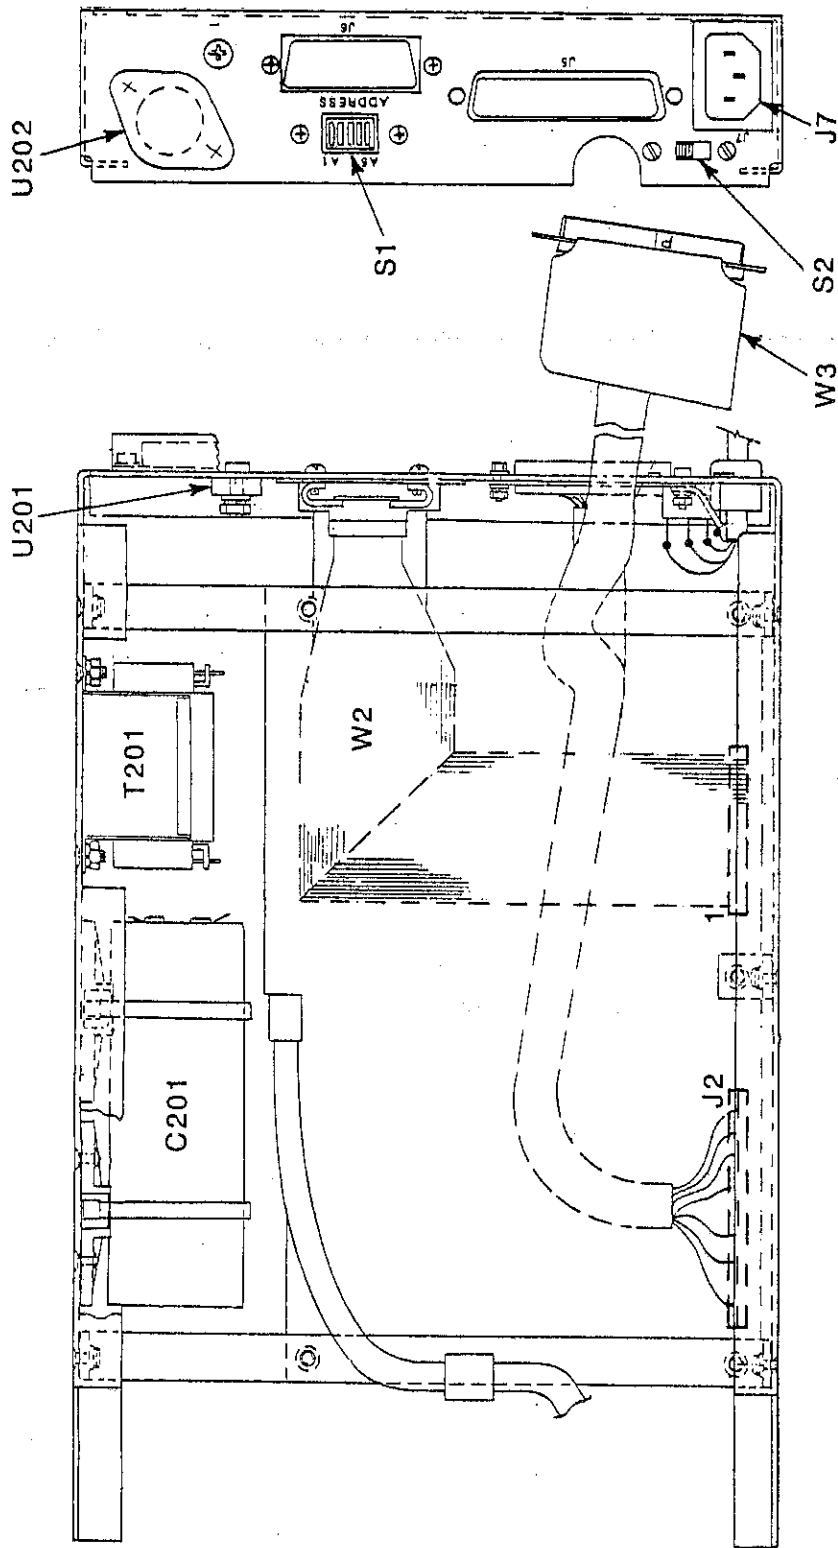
IEEE Interface Lower Chassis Assembly A4, Parts Location Diagram
